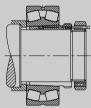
Dismounting of Withdrawal Sleeve by using Hydraulic Pressure
